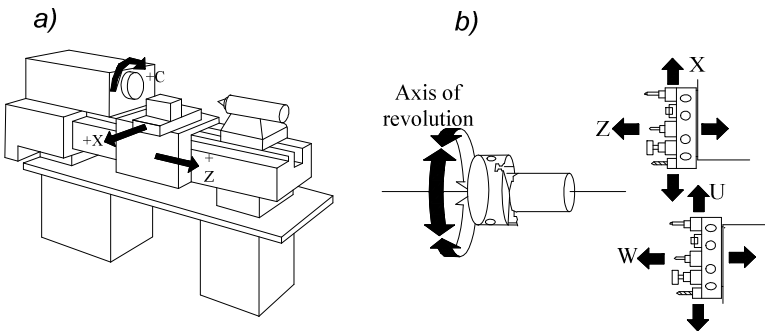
NC axes of turning centers: a) lathe and b) turret
